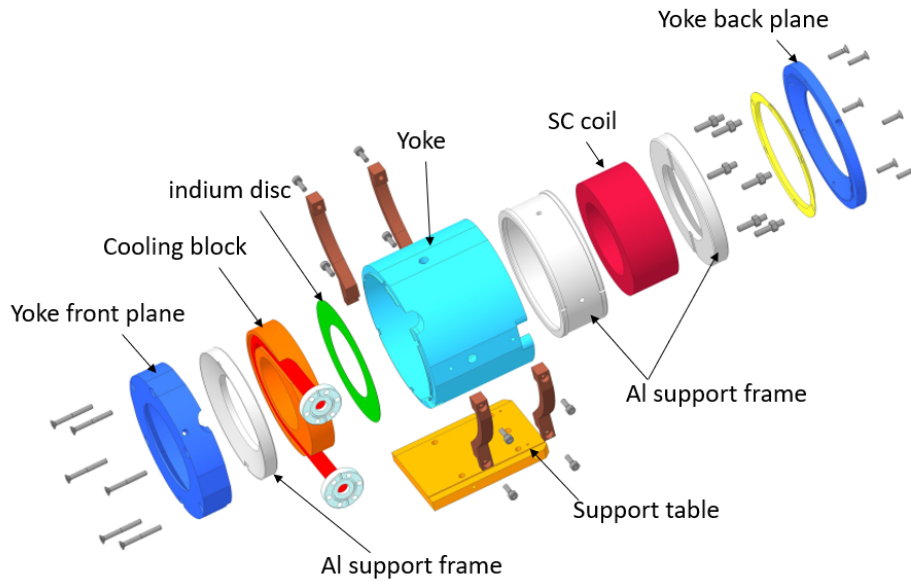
Exploded CAD drawing of the SC solenoid.
